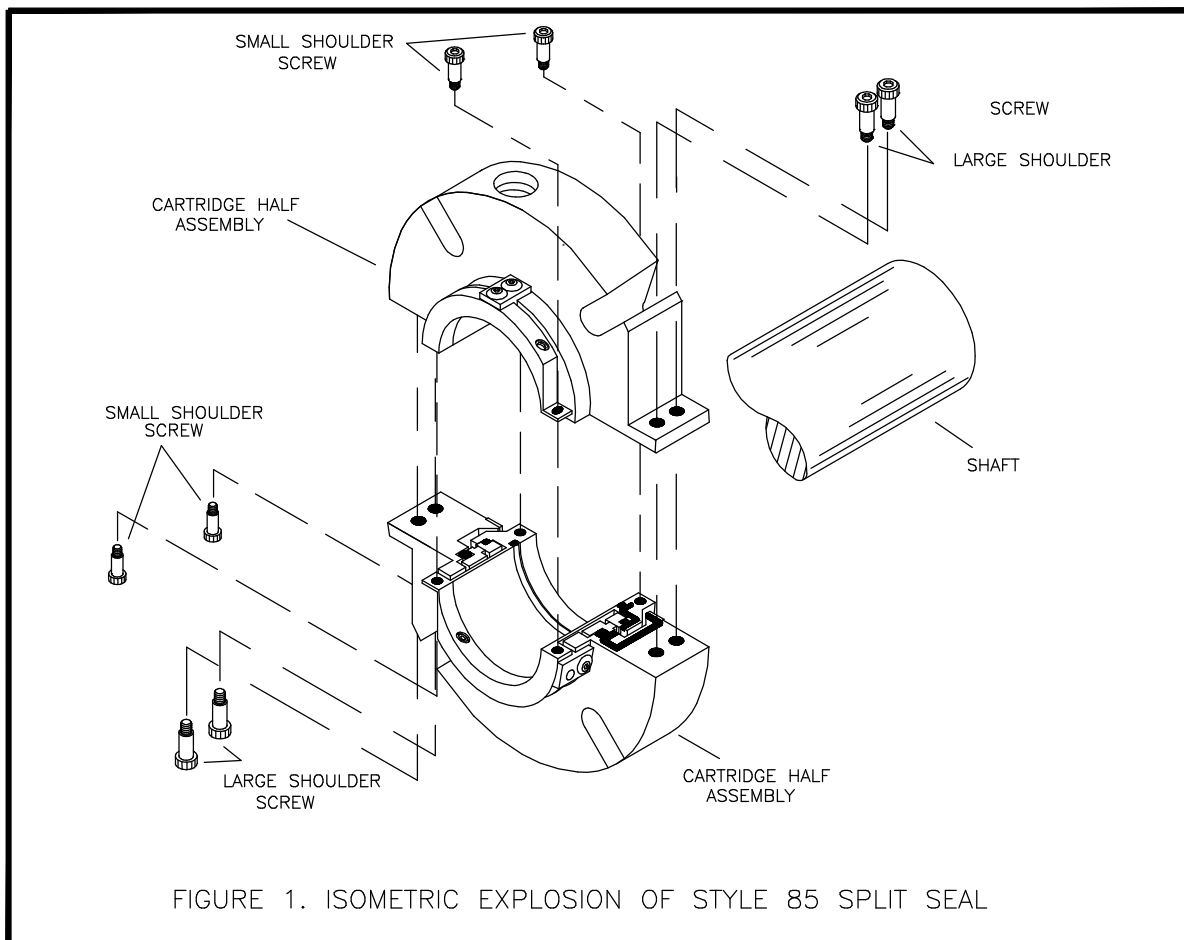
ISOMETRIC EXPLOSION OF STYLE 85 SPLIT SEAL
